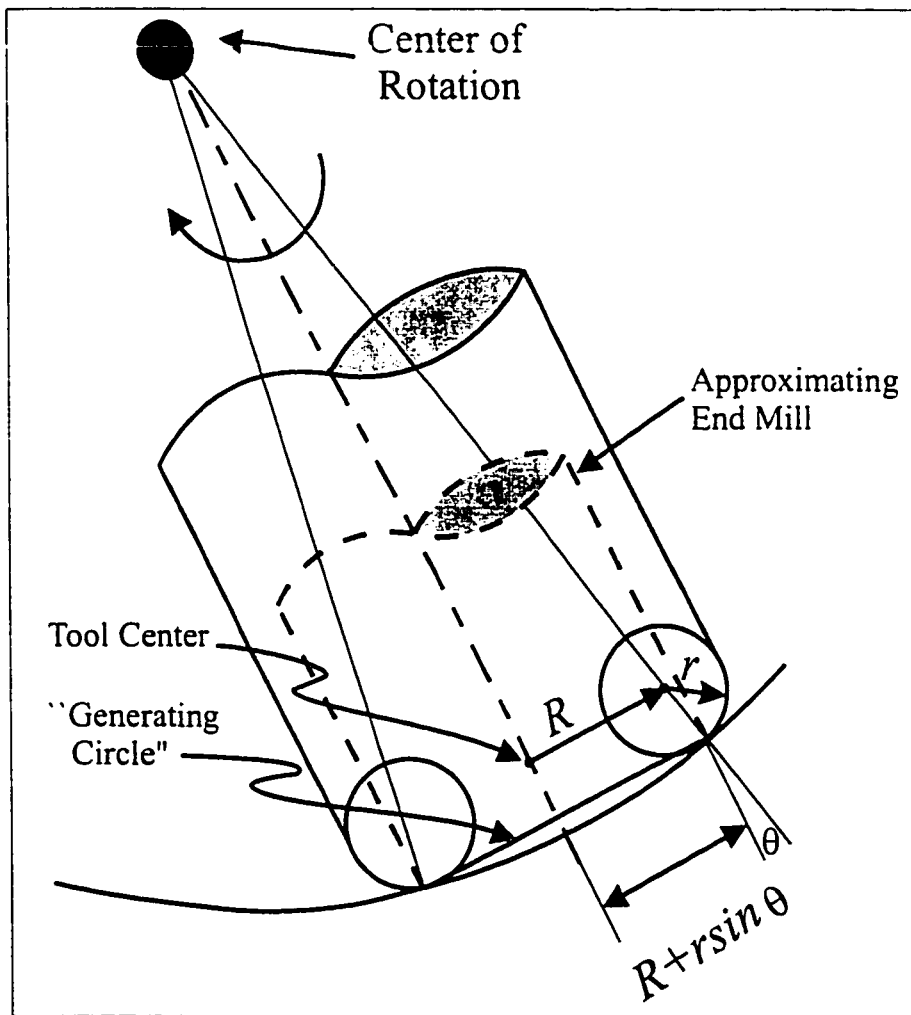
A Toroidal Cutter Generating a Spherical Surface
